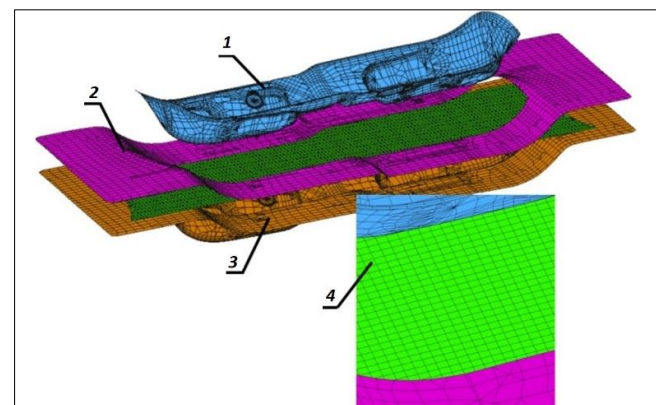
Discrete model of the parts of the die and the blanket (1 – stamp, 2 – holder, 3 – die, 4 – blanket)
